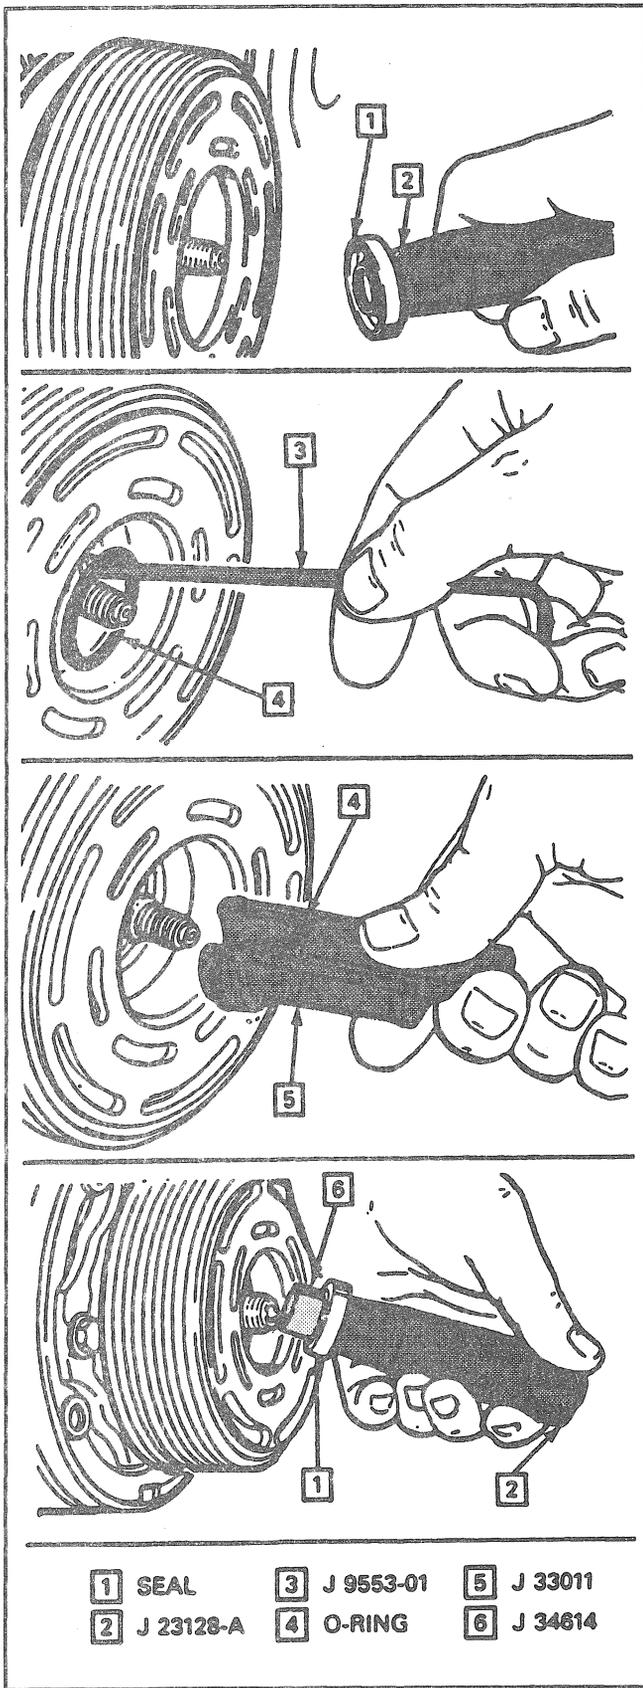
Removing and Installing Shaft Seal and O-Ring
